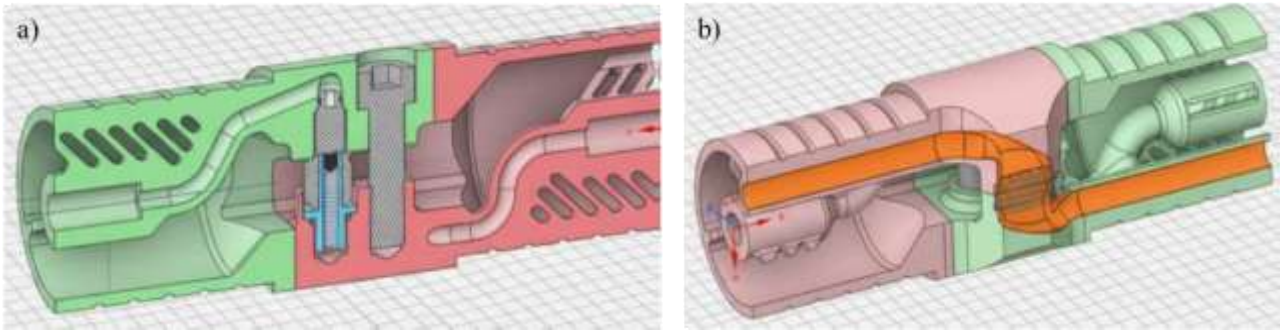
Cross-section of lower joint showing the internal routing of the (a) hydraulic and (b) electrical connectors.
